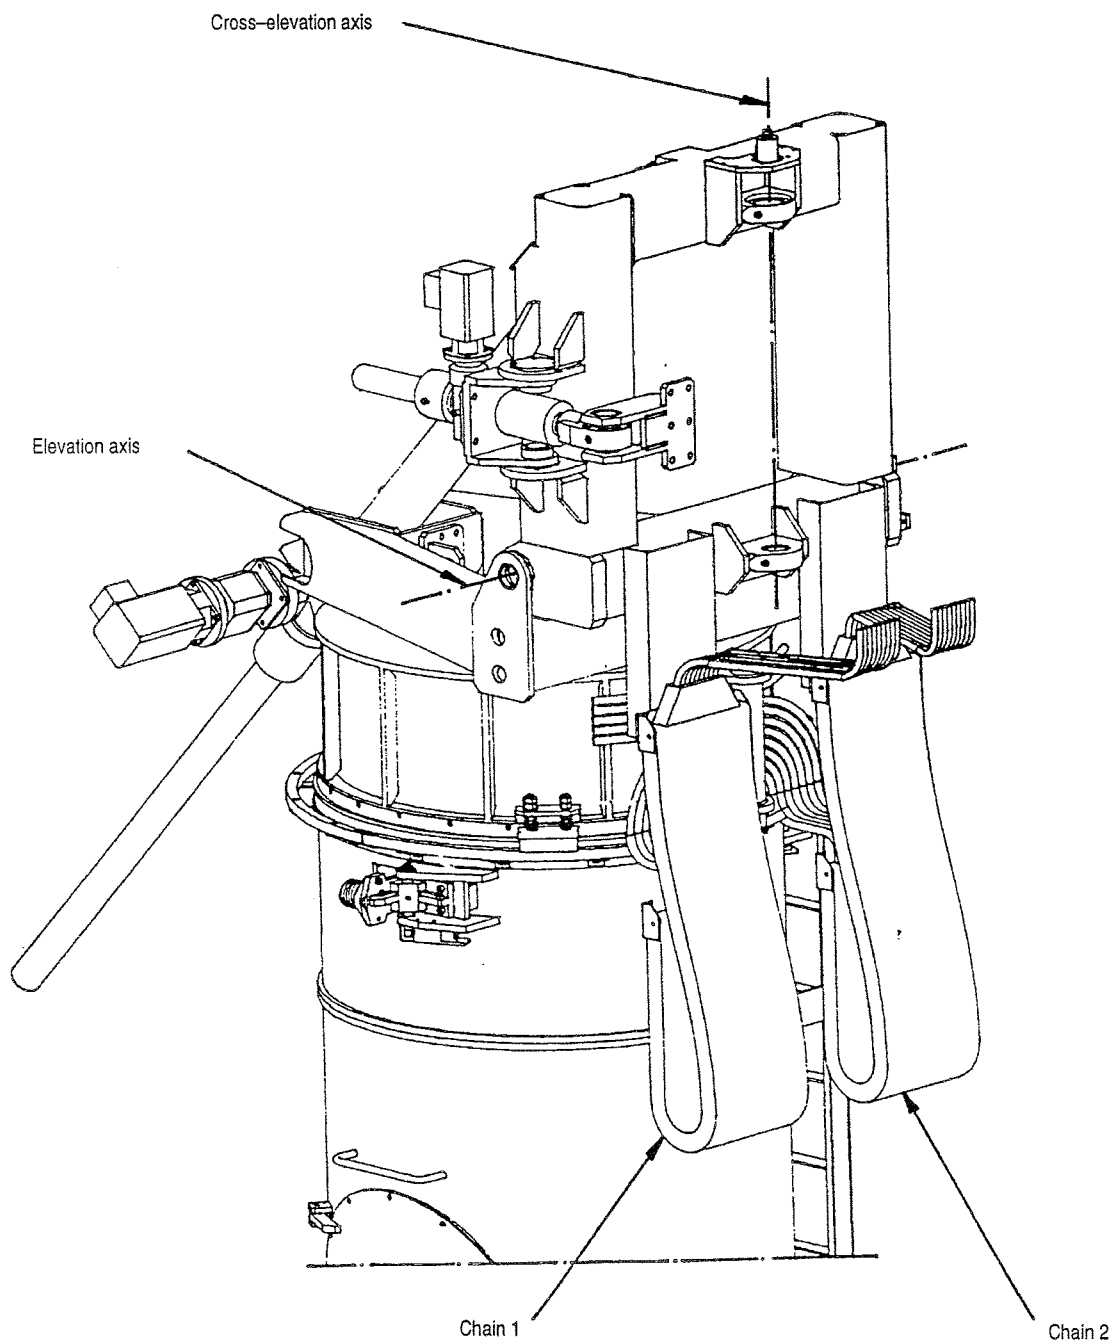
Antenna – Elevation and cross-elevation cable chains
